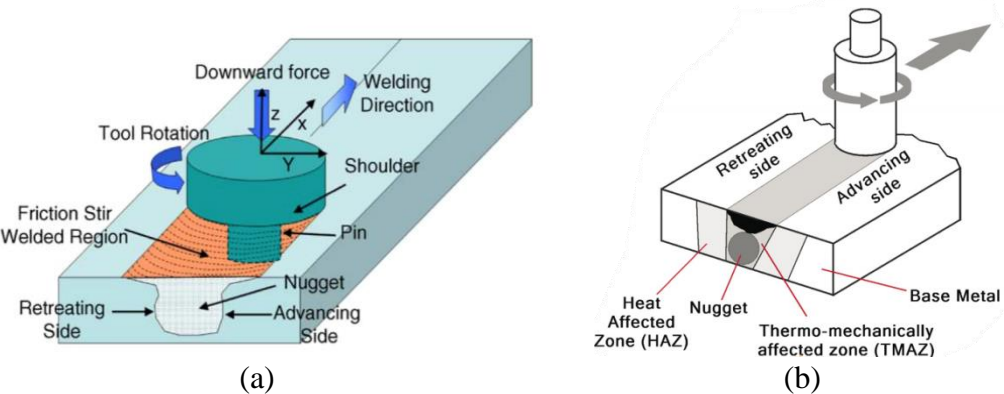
a) Tool geometry, b) Weld affected zones.
